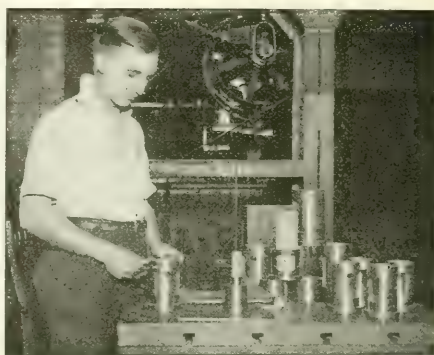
FINAL INSPECTION OF THE FINISHED BEARING
